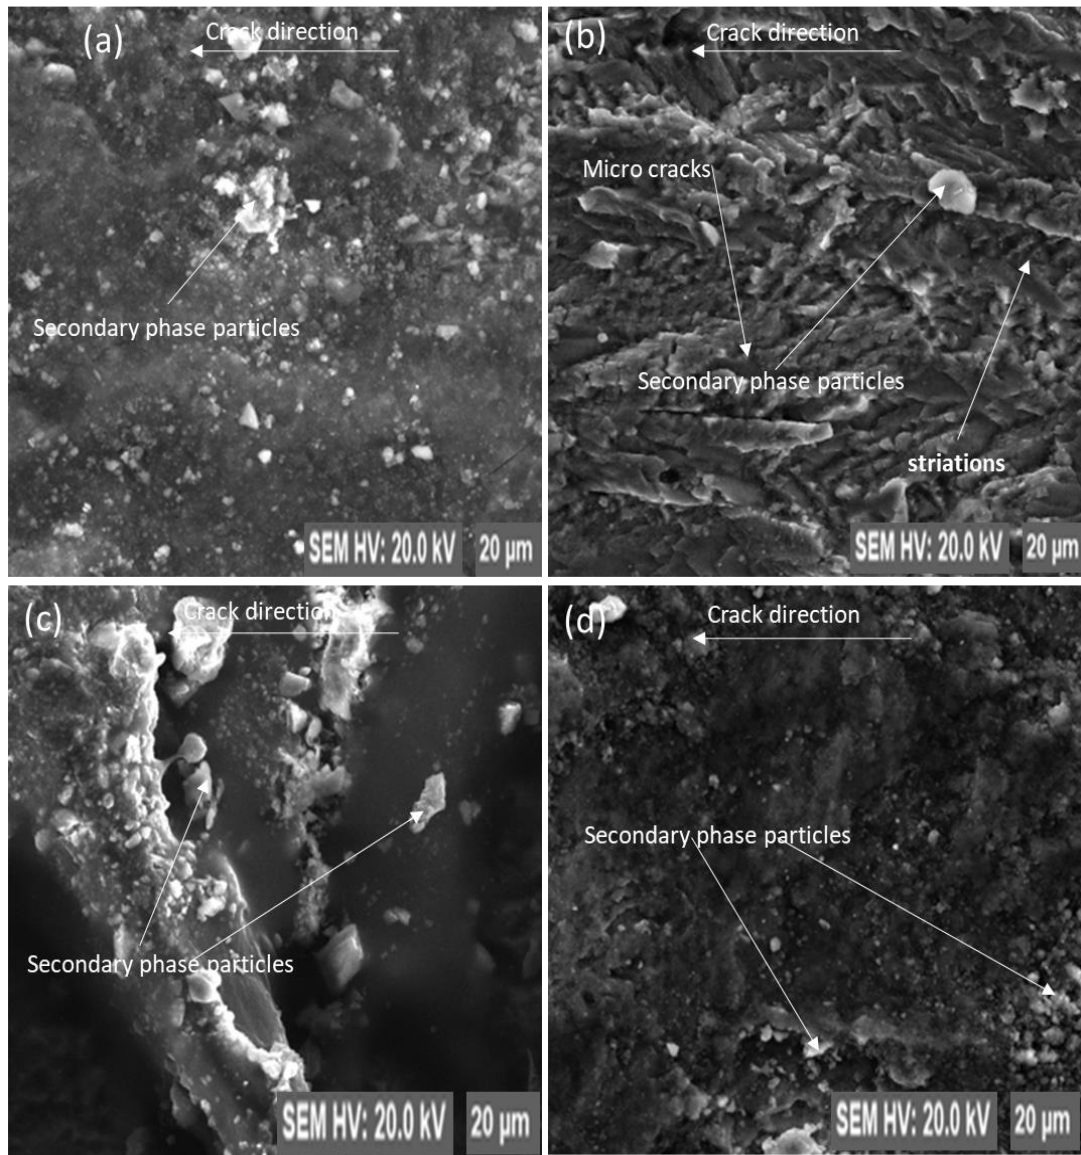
Fatigue crack propagation morphology of Al alloy 7075-T6, (a) CPS - countersunk rivet hole, (b) CPF -countersunk rivet hole, (c) CPS –perpendicular rivet hole, (d) CPF - perpendicular rivet hole.
